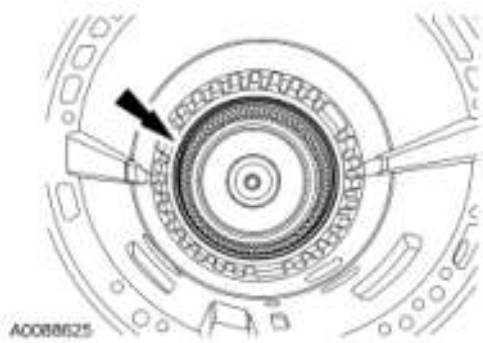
Locating Planet Carrier Hub & Output Shaft Assembly
